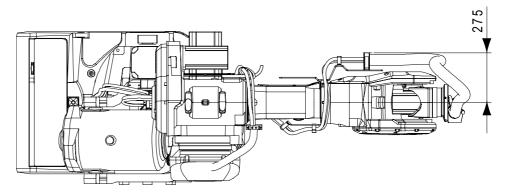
External routing Material Handling, option 798-1 and 780-3 (Dimensions in mm).
